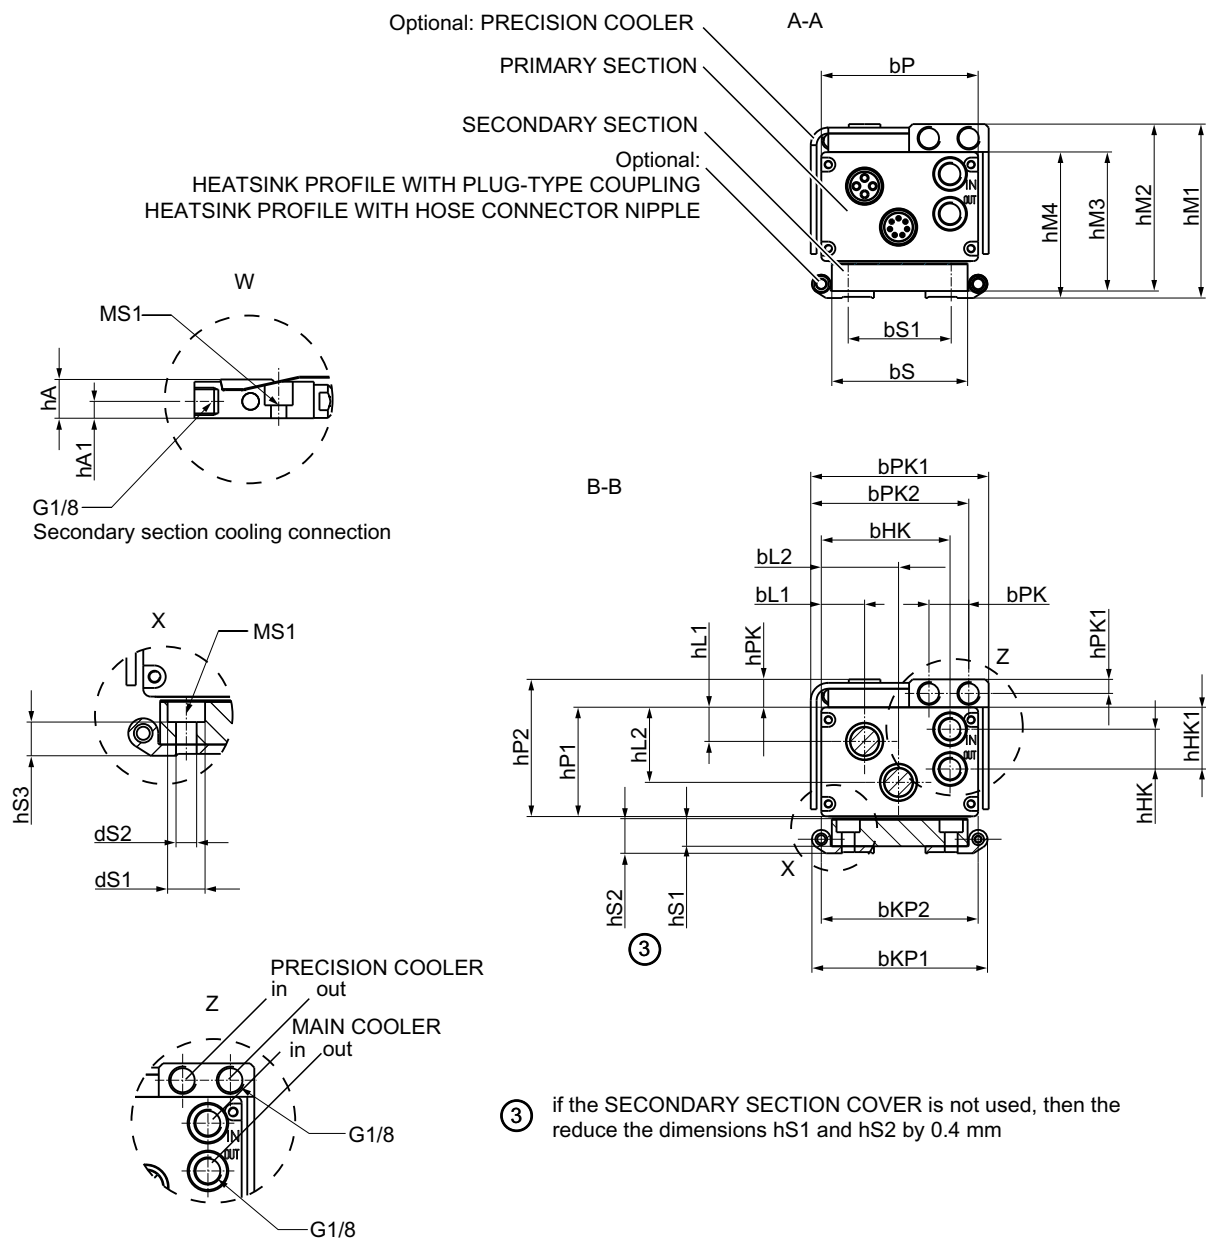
Installation dimensions for 1FN3050 motors with two cable connections (cross sections and details)
